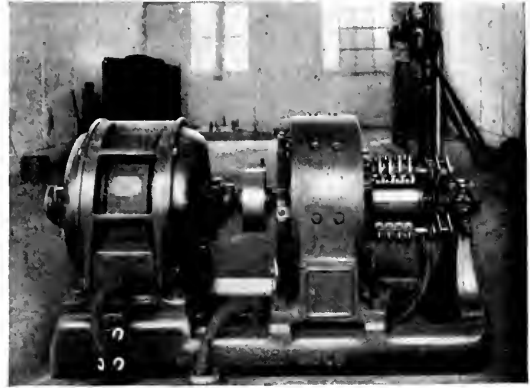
500 Amp. Electric Arc Welding Set with Control Equipment in Background
